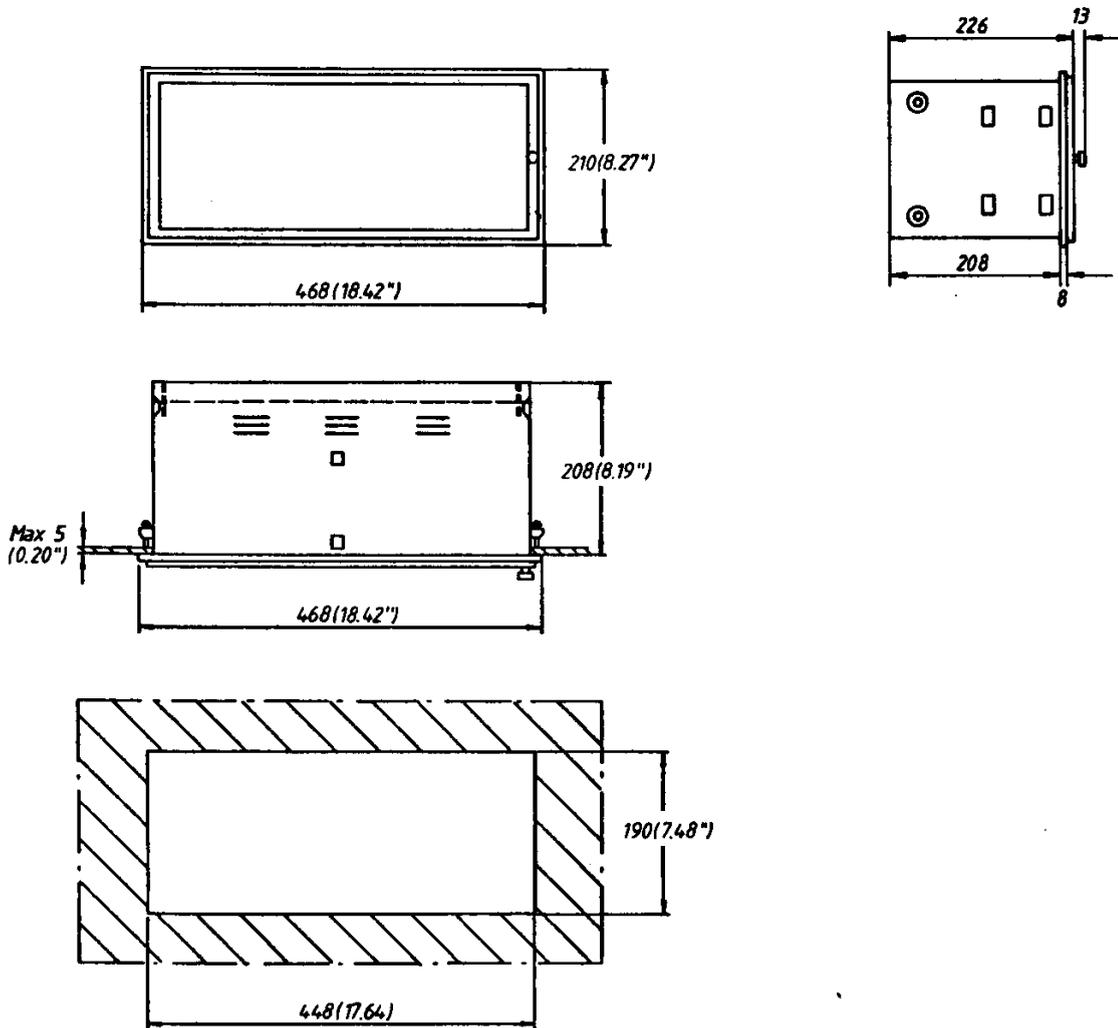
Physical dimensions of relay case type RHGX 12 and cutout.
